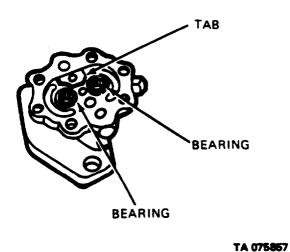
Remove/Install Lower Case Tab and Bearings.
